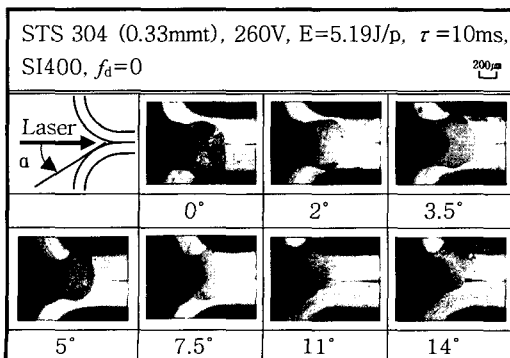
Cross-section of weld by incident angle(α) of laser beam
